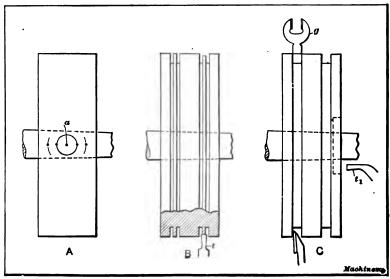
Successive Steps in Turning Packing-ring Grooves
